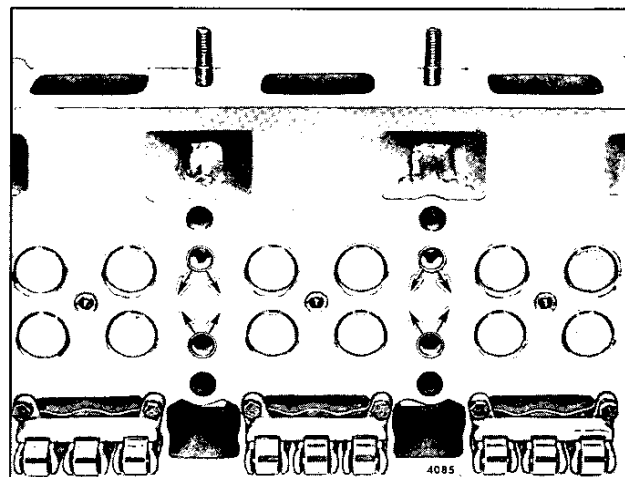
Correct Installation of Water Nozzles in Four-Valve Cylinder Head
